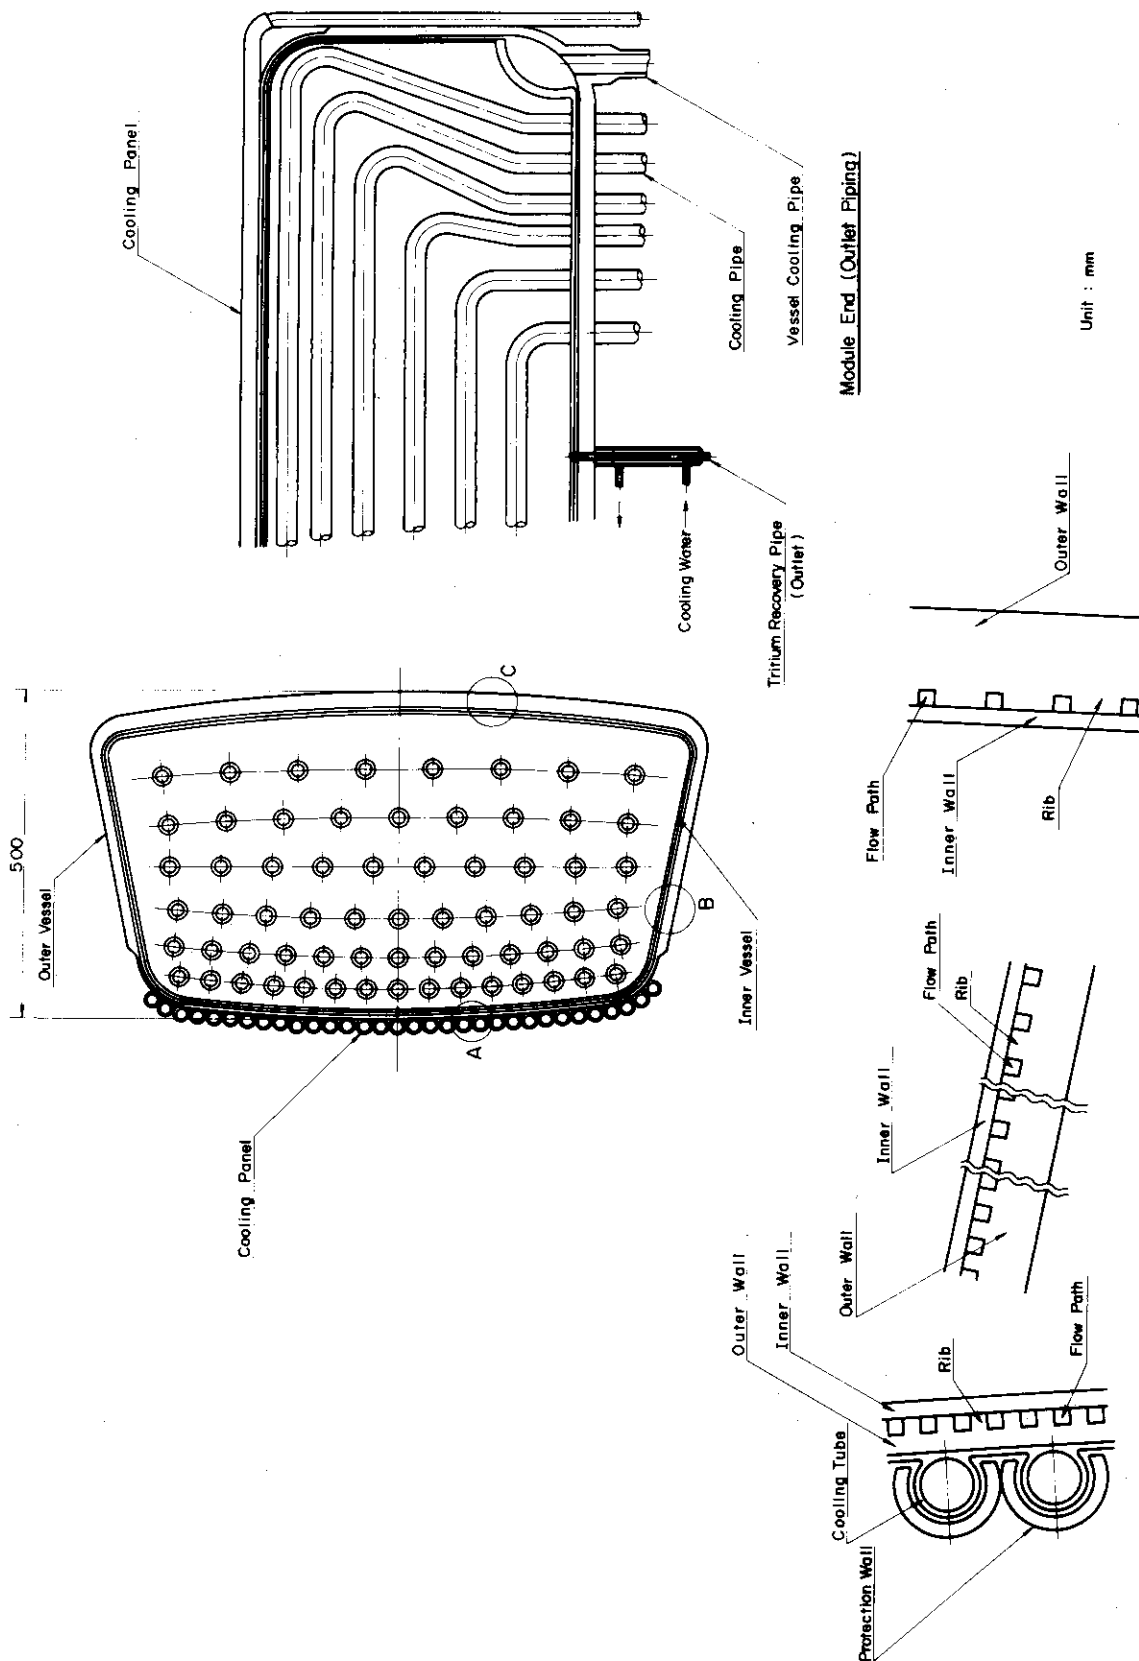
Side View of Breeding Blanket (Tube in Shell Type)
